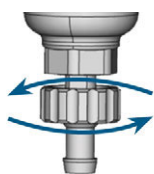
OPENING / CLOSING THE DISCHARGE SCREW OF THE COMPRESSED AIR REGULATOR
